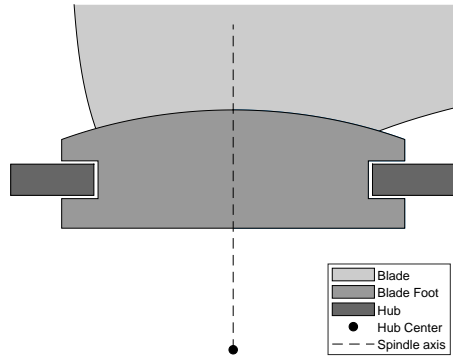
Cut view sketch of the blade bearing for a CP propeller. The blade foot is axisymmetric around the spindle axis.
